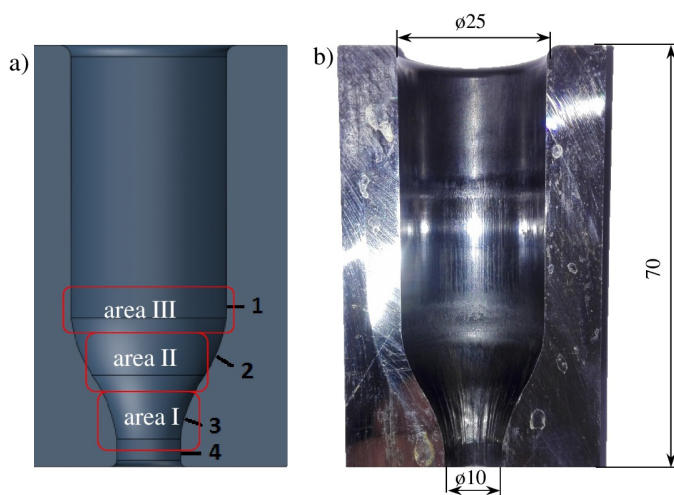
View of the tool section: a) CAD model with marked selected measurement areas, including the microhardness test points, b) exemplary image of a die's half with main dimensions in mm
